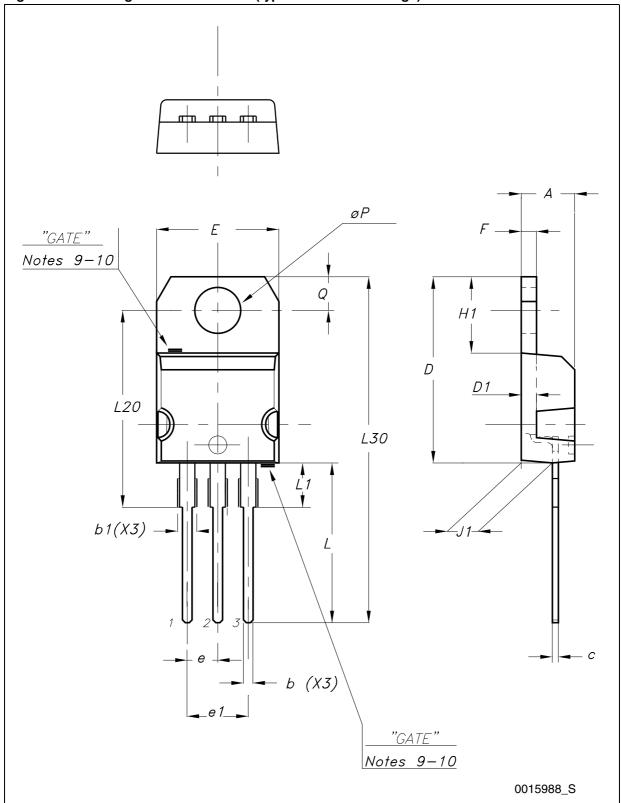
Drawing dimension TO-220 (type STD-ST Dual Gauge)
